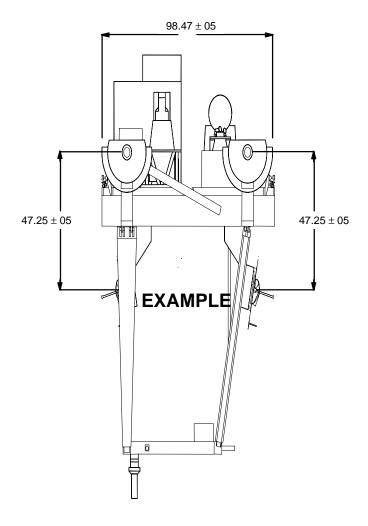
[ATTACHED PAYLOAD NAME] INSTALLATION AND TRANSLATION ENVELOPE (PAGE 2 OF 2)
